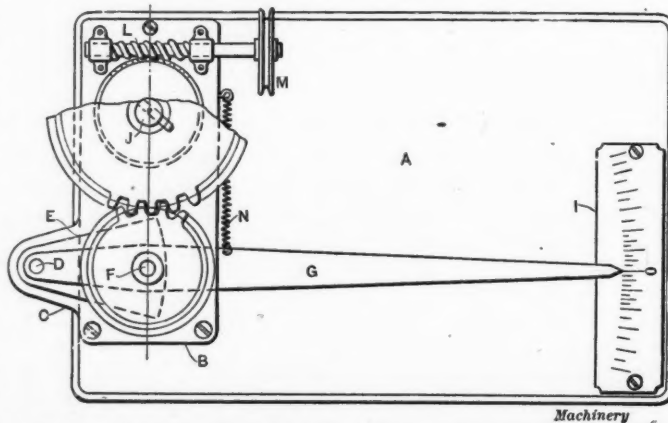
Fixture for testing Truth of Cut Gears by revolving with a Master Gear and noting Change in Center to Center Distances
